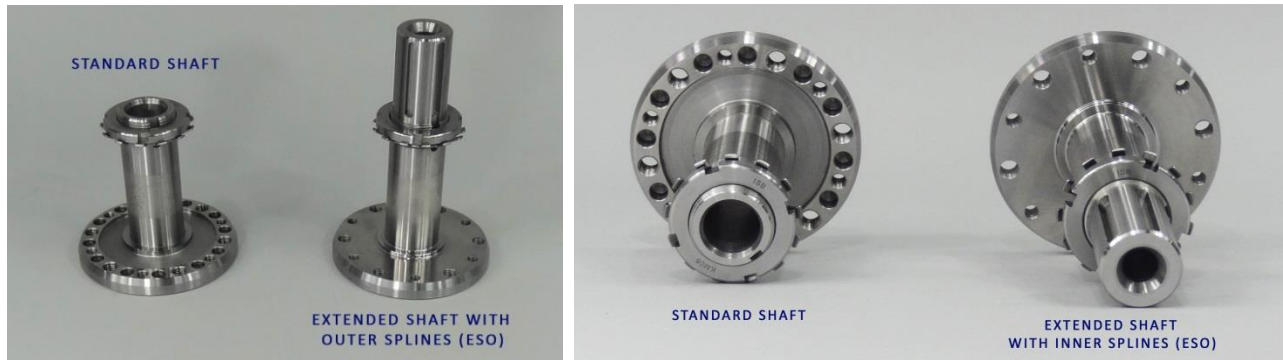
Standard motor shaft vs. extended shaft with outer splines (ESO)
